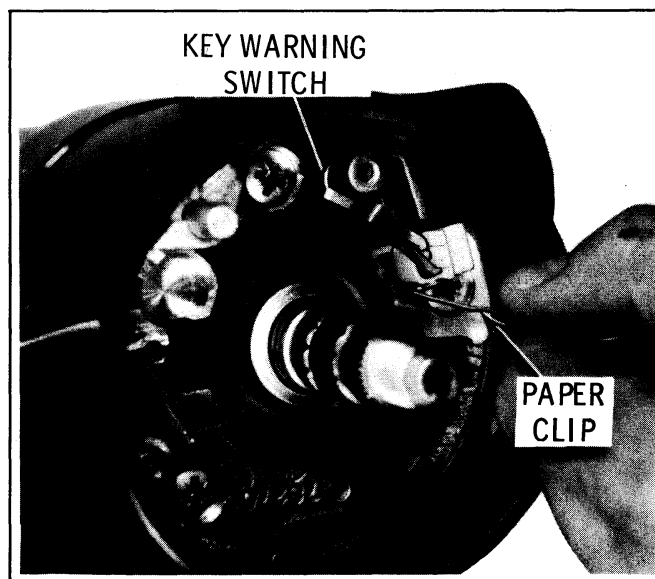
B-101--Removing Buzzer Switch and Spring Assembly
